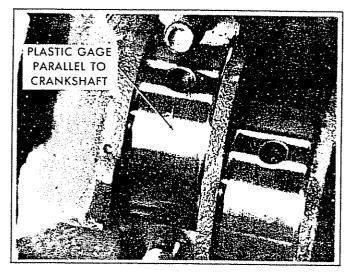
A2-35--Gaging Plastic On Crankpin-Typical (V6 Shown)
